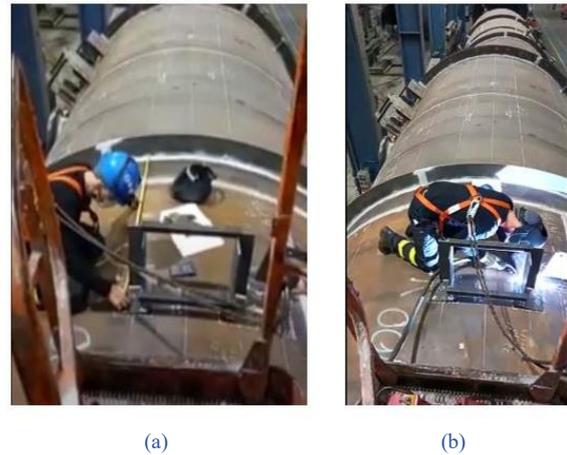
A real operator positioning the portal (a) and welding it to the can (b).
